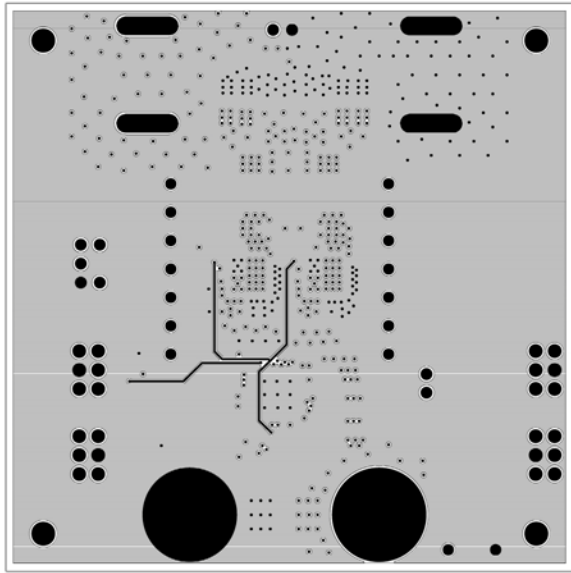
PCB - INNER LAYER 3 (TOP VIEW)
